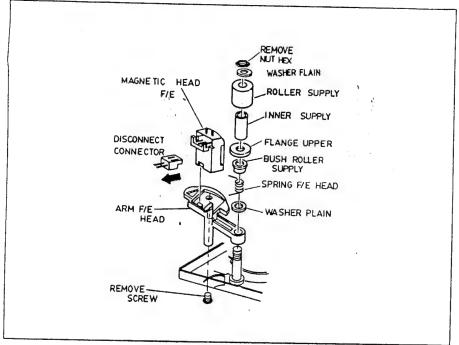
Full Erase (FE) Head/Supply Roller Romoval
